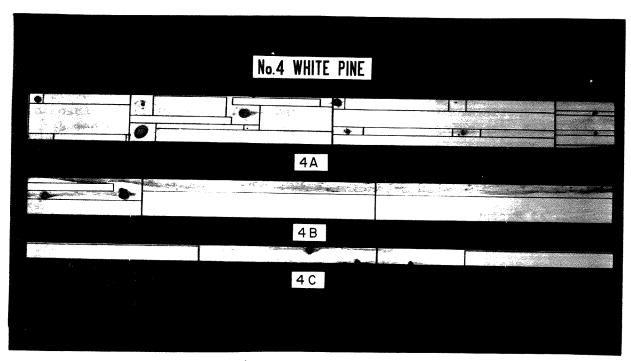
Cutting layout on selected No. 4 White Pine boards. Yields for these boards were: 4A - 84.9%; 4B - 63.2%; 4C - 48.6%.
